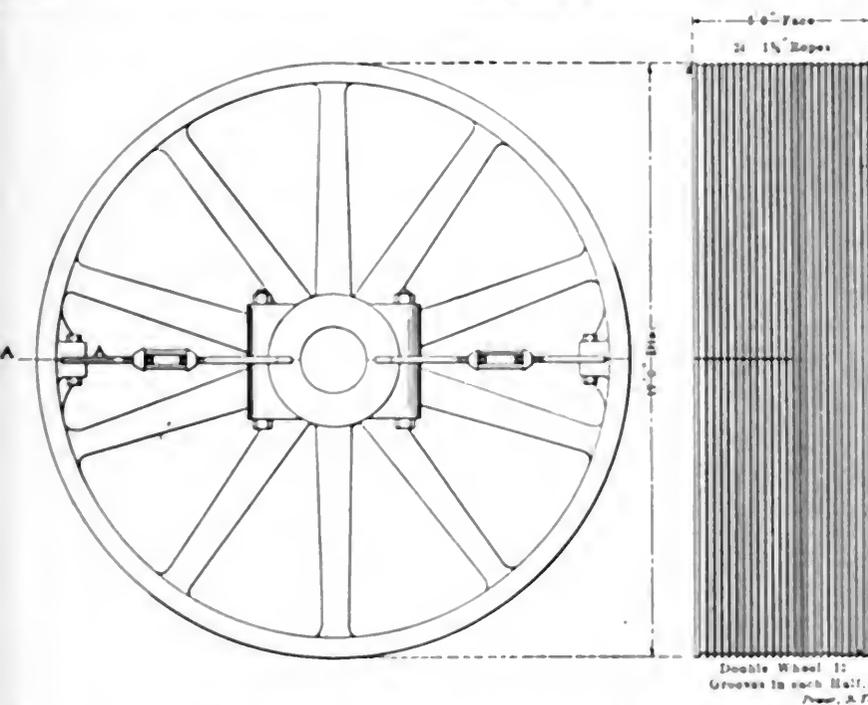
GENERAL CONSTRUCTION AND SECTION OF RIM
